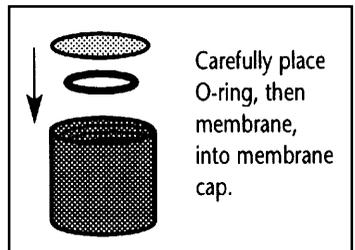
Parts of electrode showing O-ring, membrane & lock
